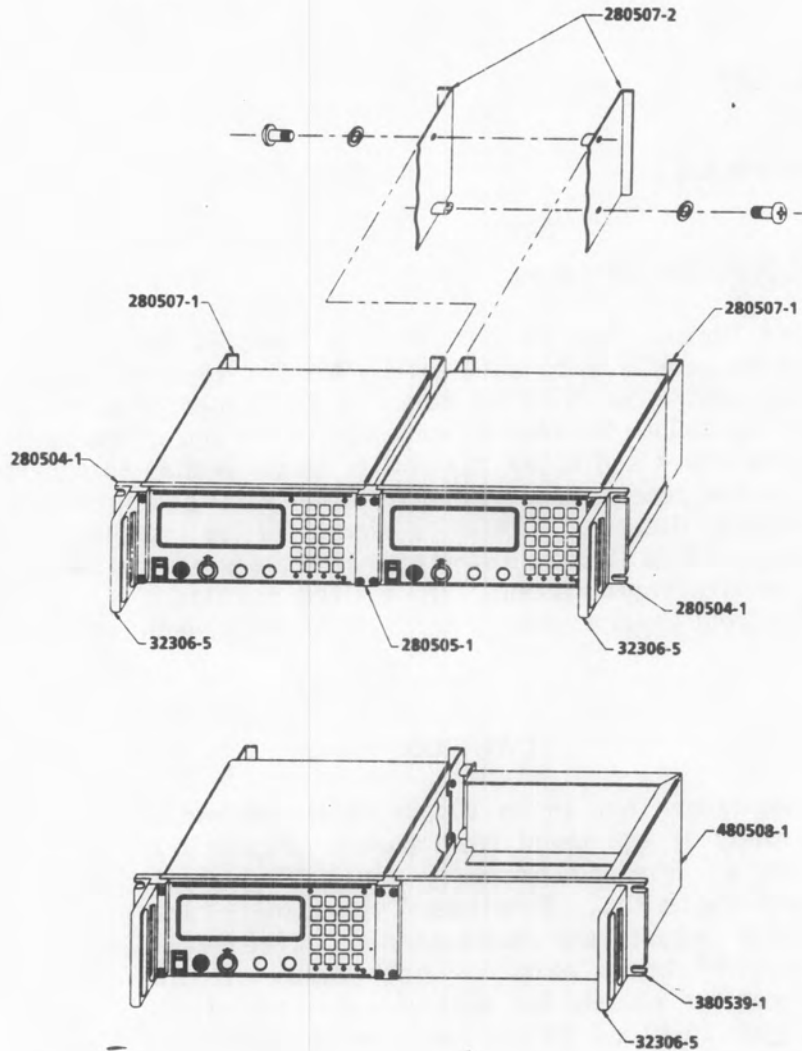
WJ-9548 Configuration of Rack Mounting Accessories
